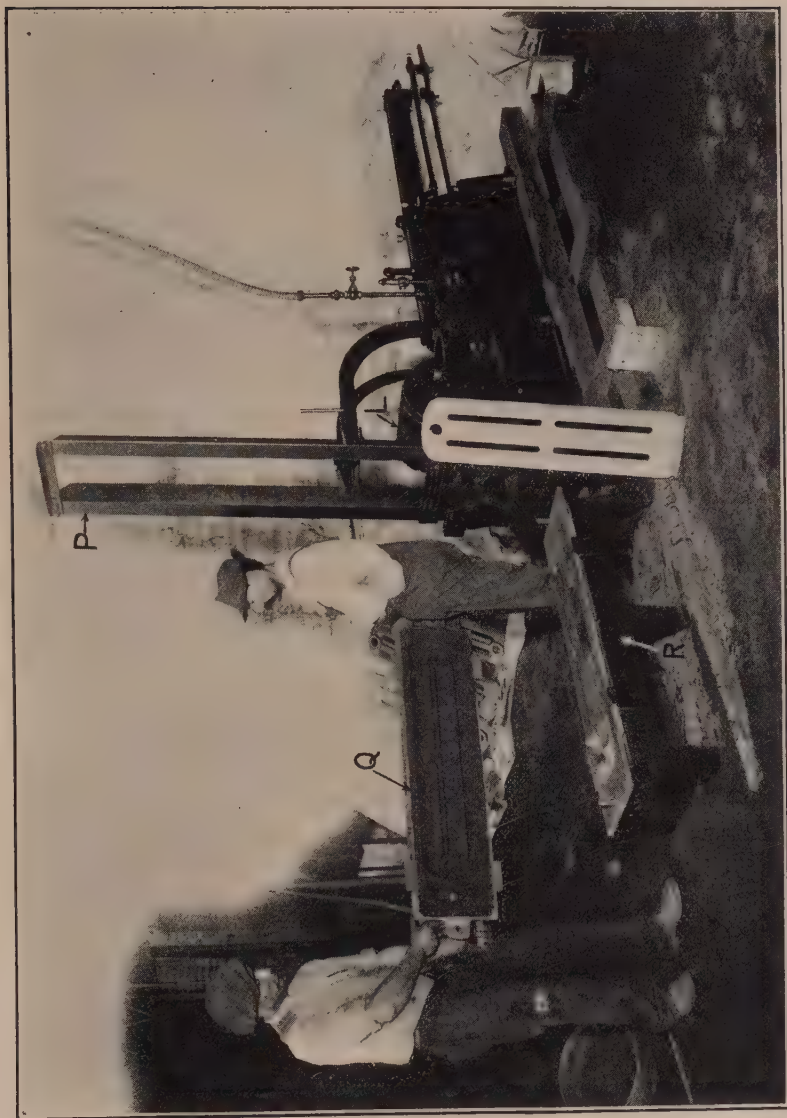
McDonald's Roller Machine after Ramming is Completed.
